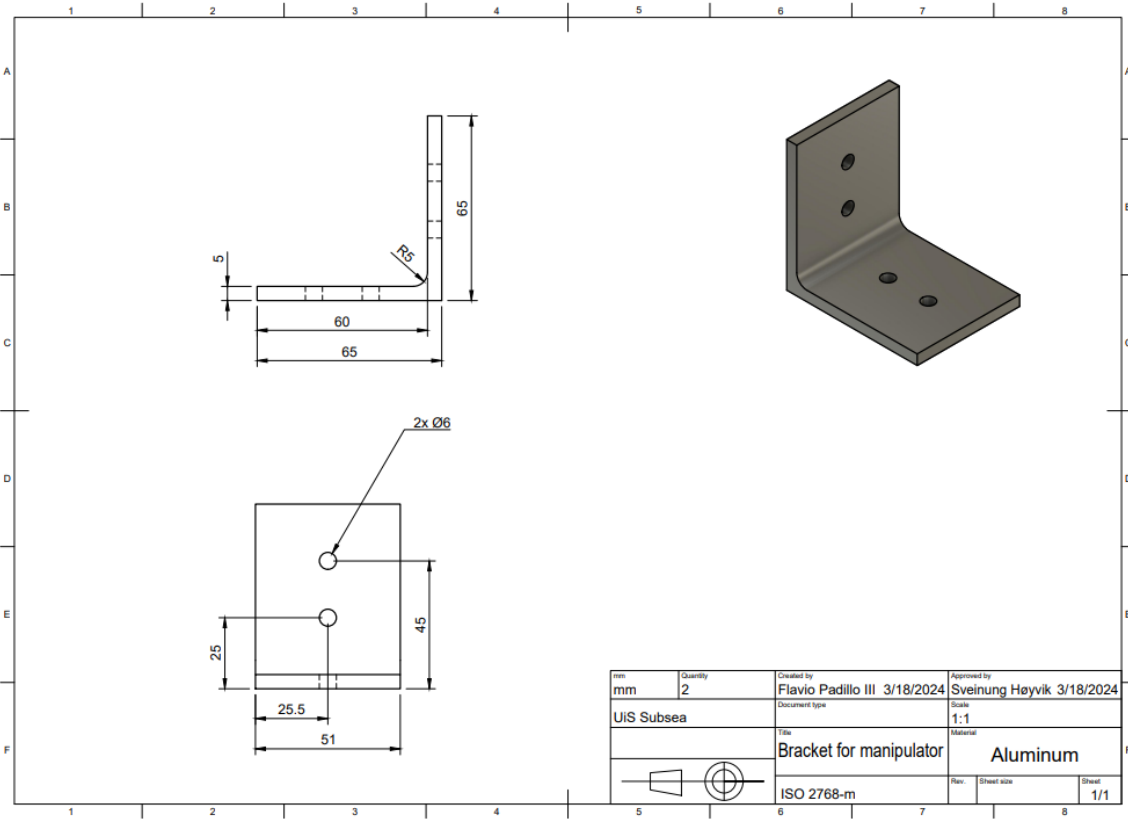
Technical drawing of the bracket for manipulator 1:2
